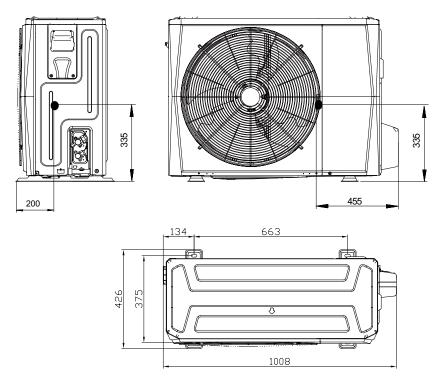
SHPAO10RP24CM dimensions (unit: mm)
